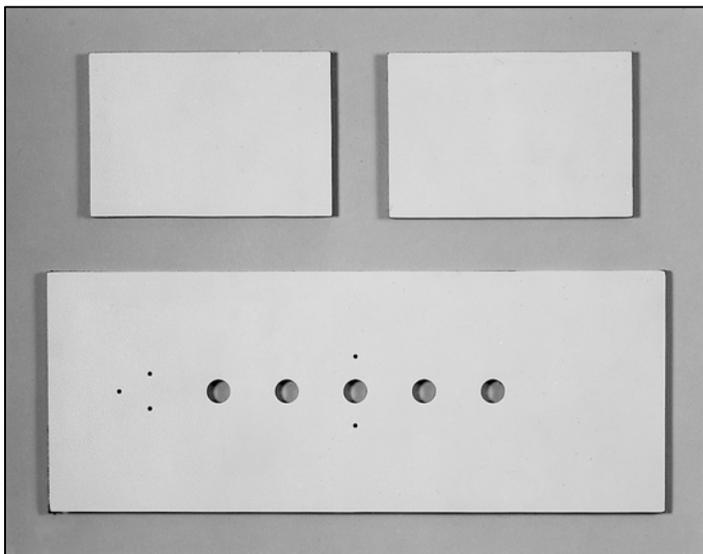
Model 07-644 Grid Alignment Test Tool, with Lead Blockers
